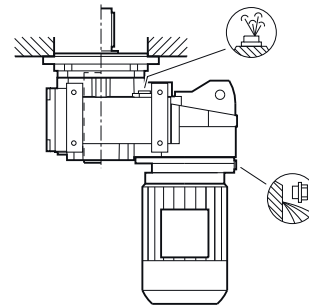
Mounting positions for parallel shaft gearbox F.AD shaft-mounted design, sizes 39 - 189
